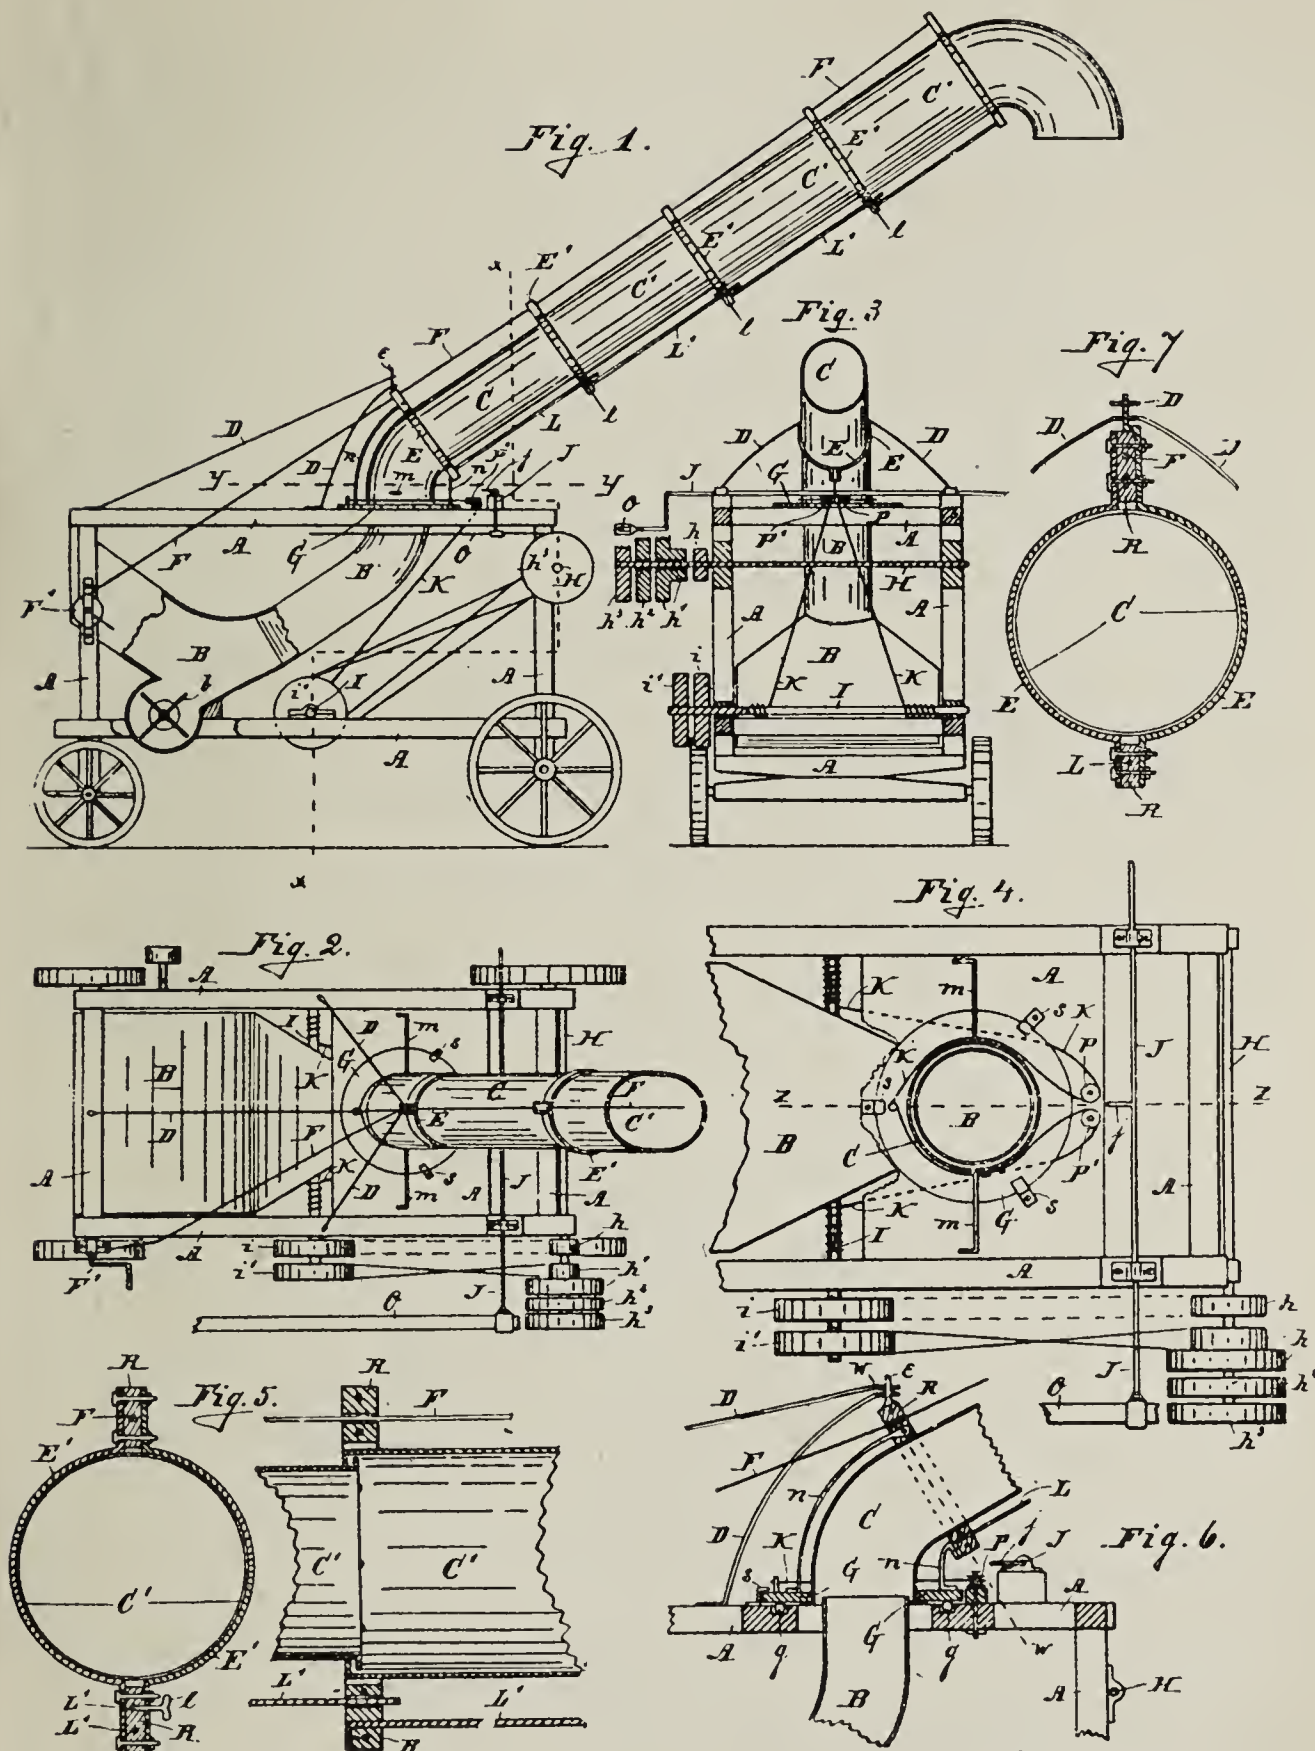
is a side view of the machine. Figure 2 is a top view of the same; figure 3, a vertical cross-section through the machine on line xx on figure 1; figure 4, a horizontal section on a larger scale on line yy in figure 1; figure 5, detail drawings and sections through the discharge-tubes; figure 6, a vertical section through the first joint of the discharge-tubes on line zz on figure 4, and figure 7 a vertical cross-section through the discharge-tube on line ww on figure 6.
